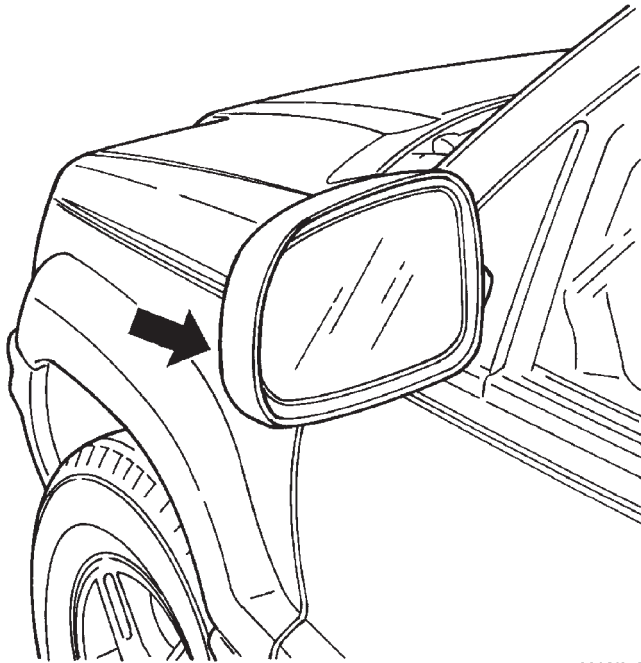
DOOR MOUNTED REAR VIEW MIRROR
